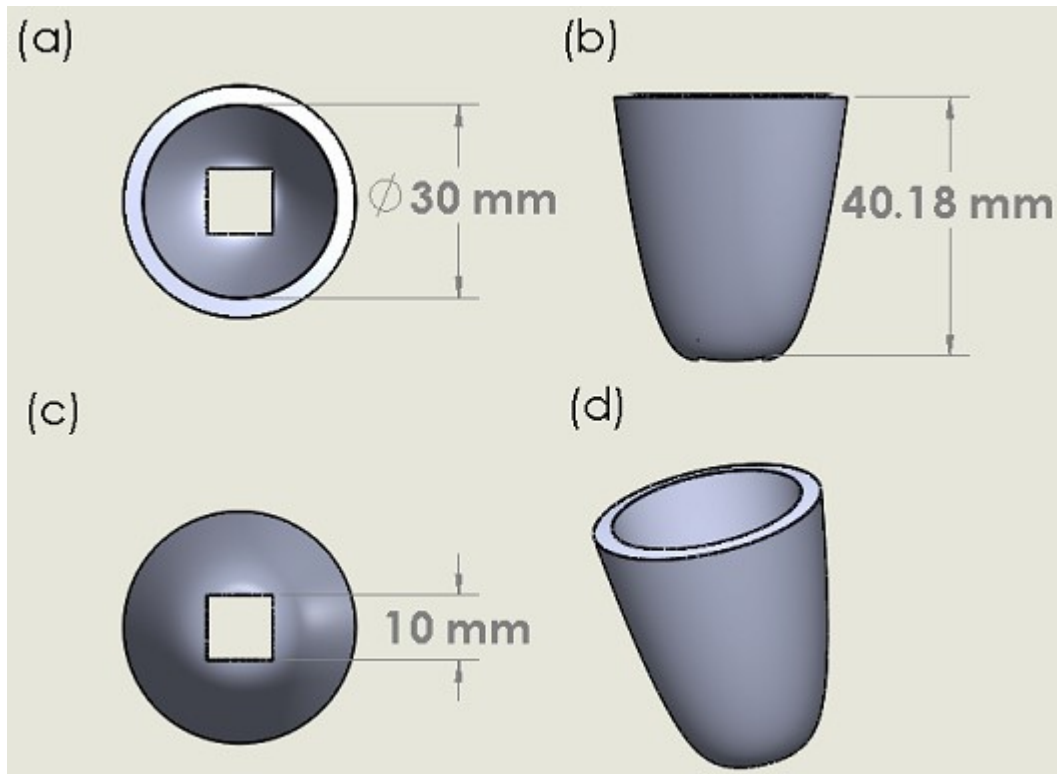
CAD design views of the 3D CPC concentrator shape and dimension in mm: (a) top view, (b) right view, (c) bottom view and (d) isometric view.
